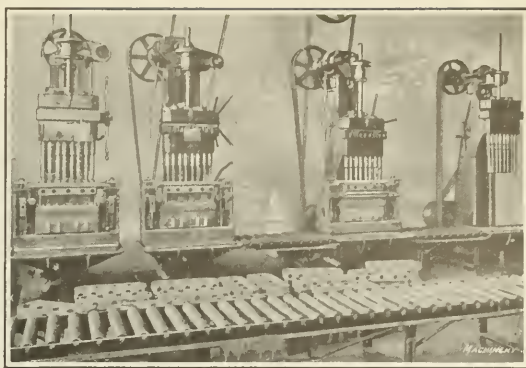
Sometimes it is feasible to design jigs and fixtures in which work may be held for the performance of a number of machining operations. This illustration shows such jigs in use in the Maxwell Motor Co.'s shops in Detroit, Mich. The work and jig are pushed along from machine to machine on a roller conveyor, the operator following the jig right down the line of machines.
